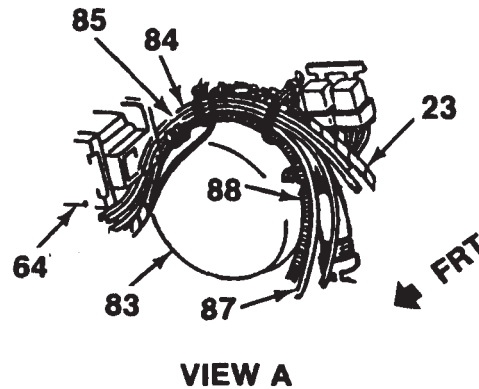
Engine Wiring - Right Front - 4.3L (L35) Engine
